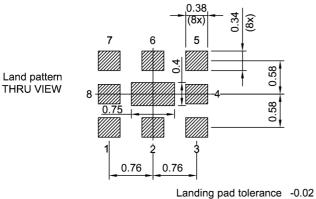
Drawing of package with package height A = 0.45 mm (max.). See Simplified drawings (p. 15).
